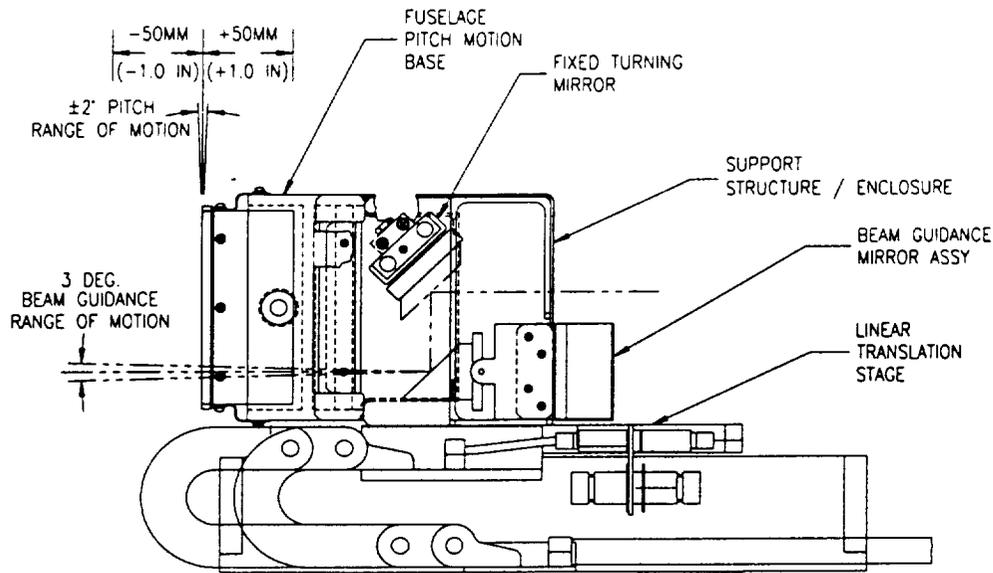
Nested housing arrangement of Pylon Mirror Motion Base assembly with torque motors and motion cams installed.
